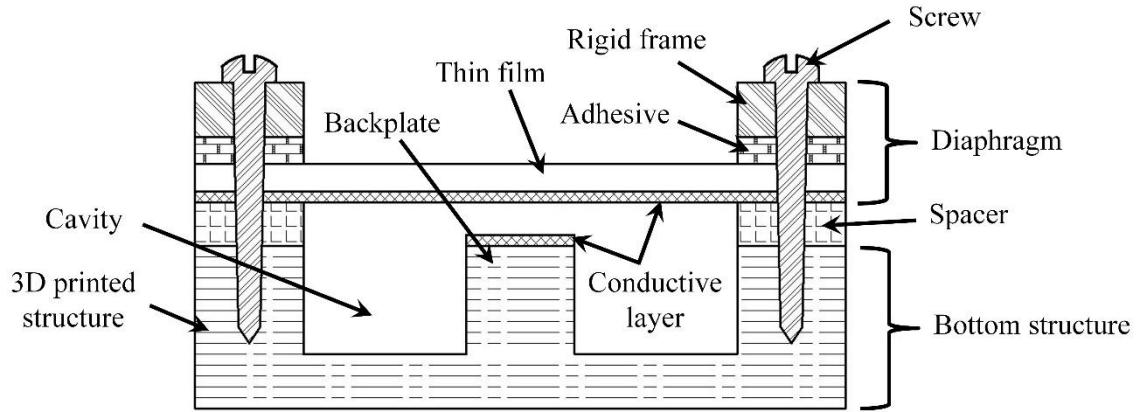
Schematic diagram of the cross-sectional view of the capacitive acoustic transducer after complete assembly.
